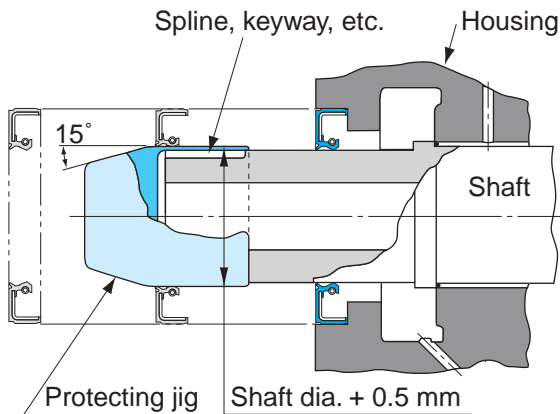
Seal protecting jig for spline, keyway, holes on shaft
